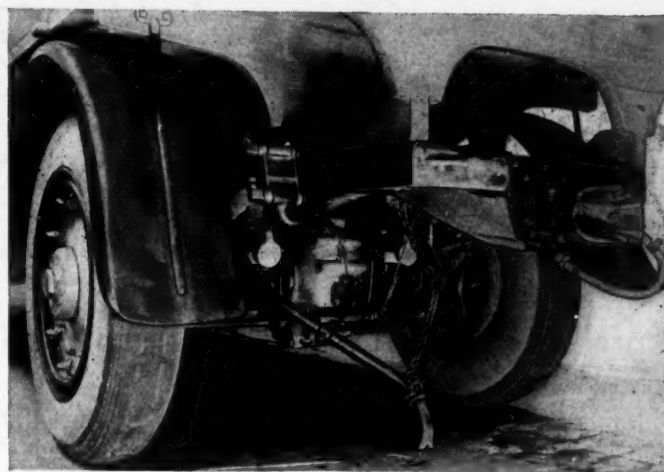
Showing brakes on truck rear axle. (Note brake cylinder on top of axle housing and air hose extension for trailer)
